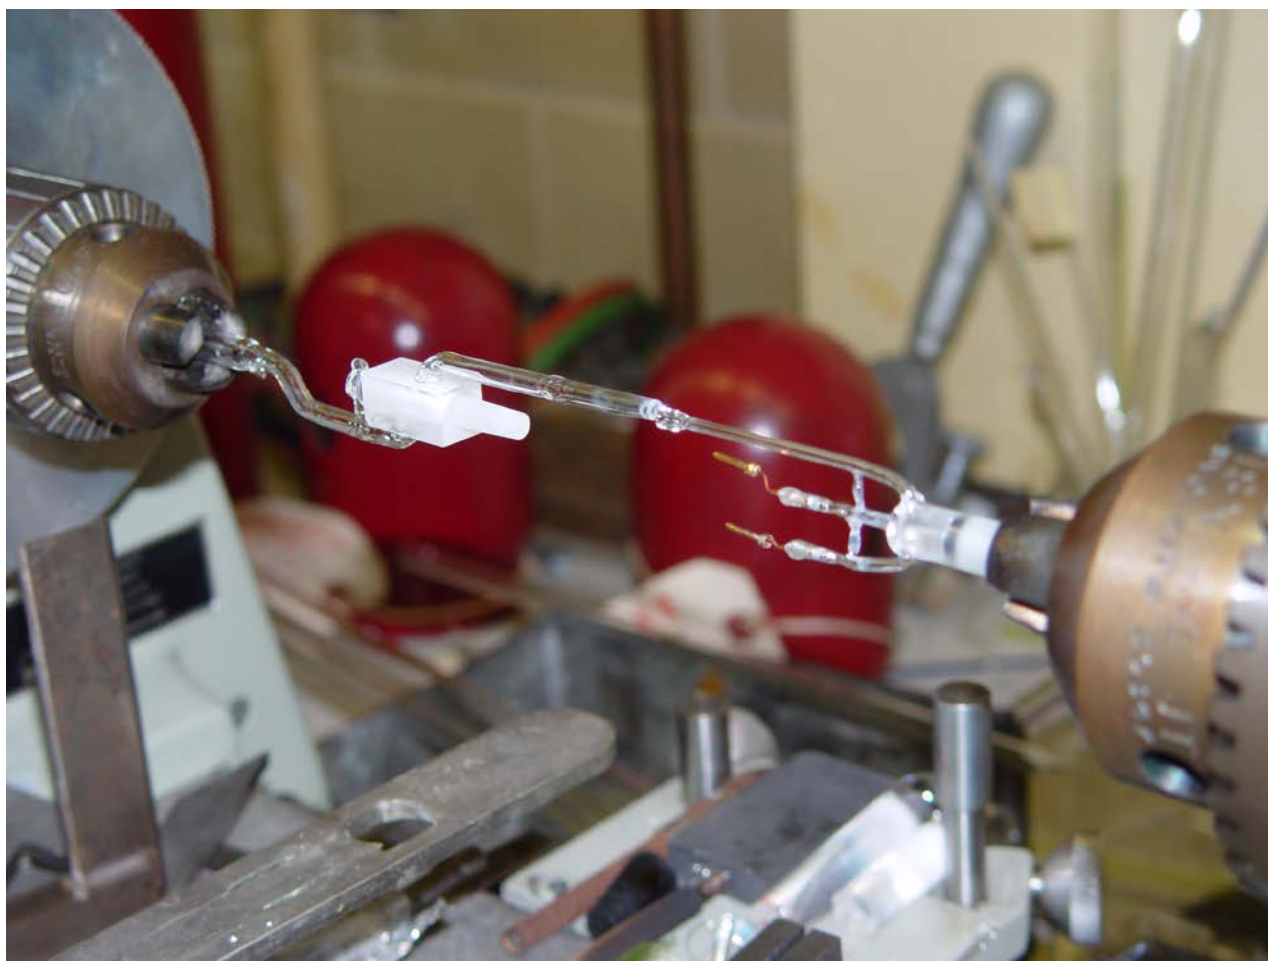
Sealing a stopcock to a GPC - step I. The counter and stopcock are mounted in a glassblowers lathe. Their tubes for the gas inlet should be in alignment with each other. The stopcock is configured earlier using a jig that aligns the barrel with the connector (left). The position of the gas inlet tube on the counter was aligned earlier to center the GPC with respect to the stopcock plug and connector. Note, electrodes are not present at this point for a new counter. This photo was of a working counter where the stopcock broke off and needed replacing.
